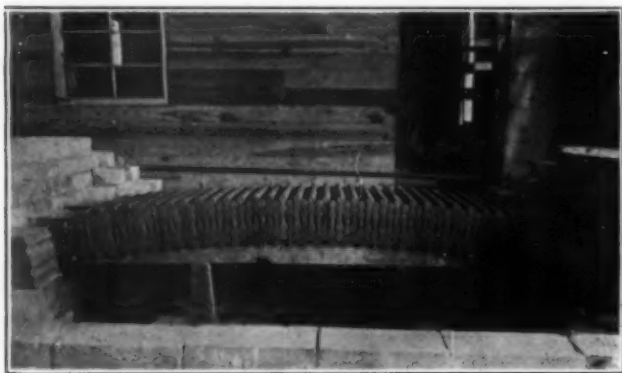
RESISTOR PLATES ASSEMBLED.
